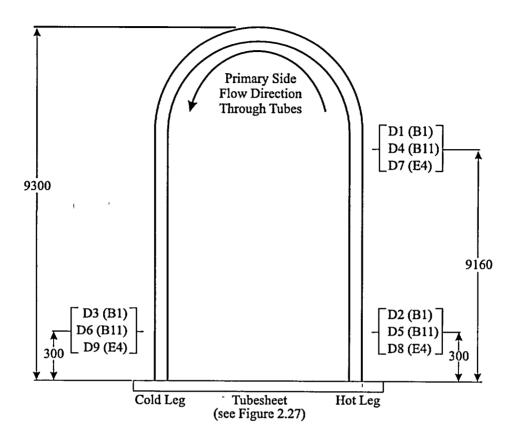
Steam Generator (BO1, BO2) Tube Details
